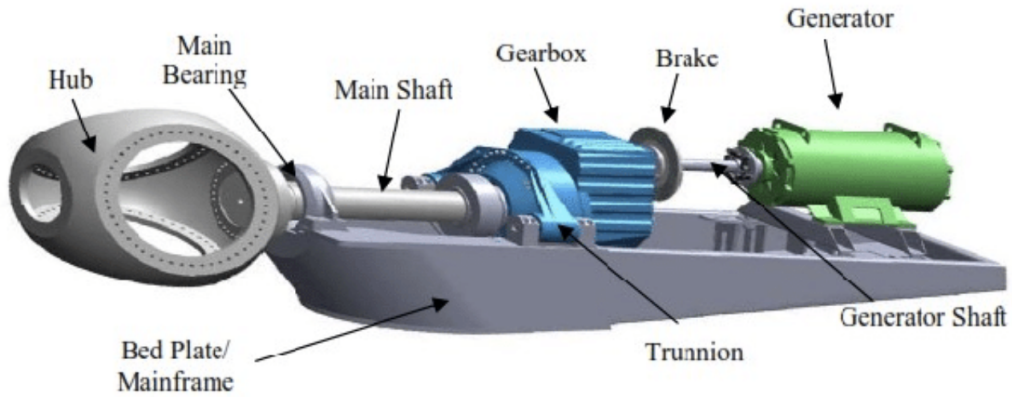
A typical gearbox wind turbine drivetrain. (Taherian Fard et al. 2018)
